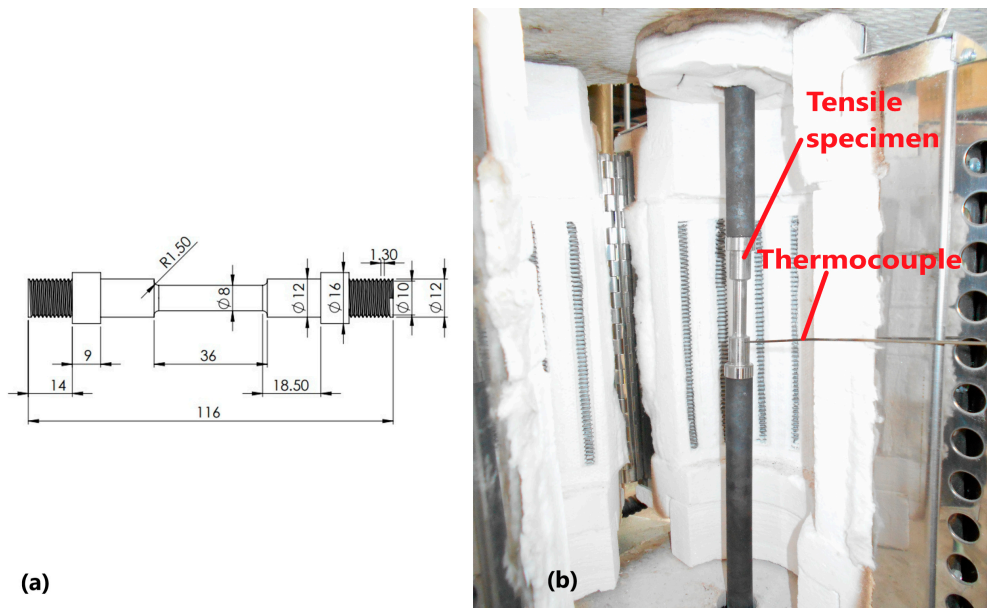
The hot tensile tests. (a) Dimension of the tensile specimen; (b) Vertical furnace, with electric heating.
